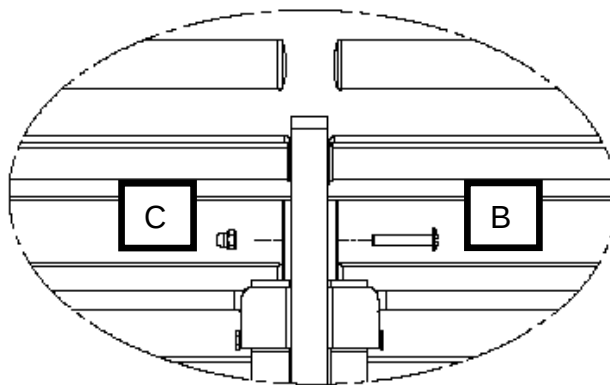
Detail G; cabinet joining (see also fig. 9 chap. 8.4.2 or fig. 14 chap. 8.4.3)
